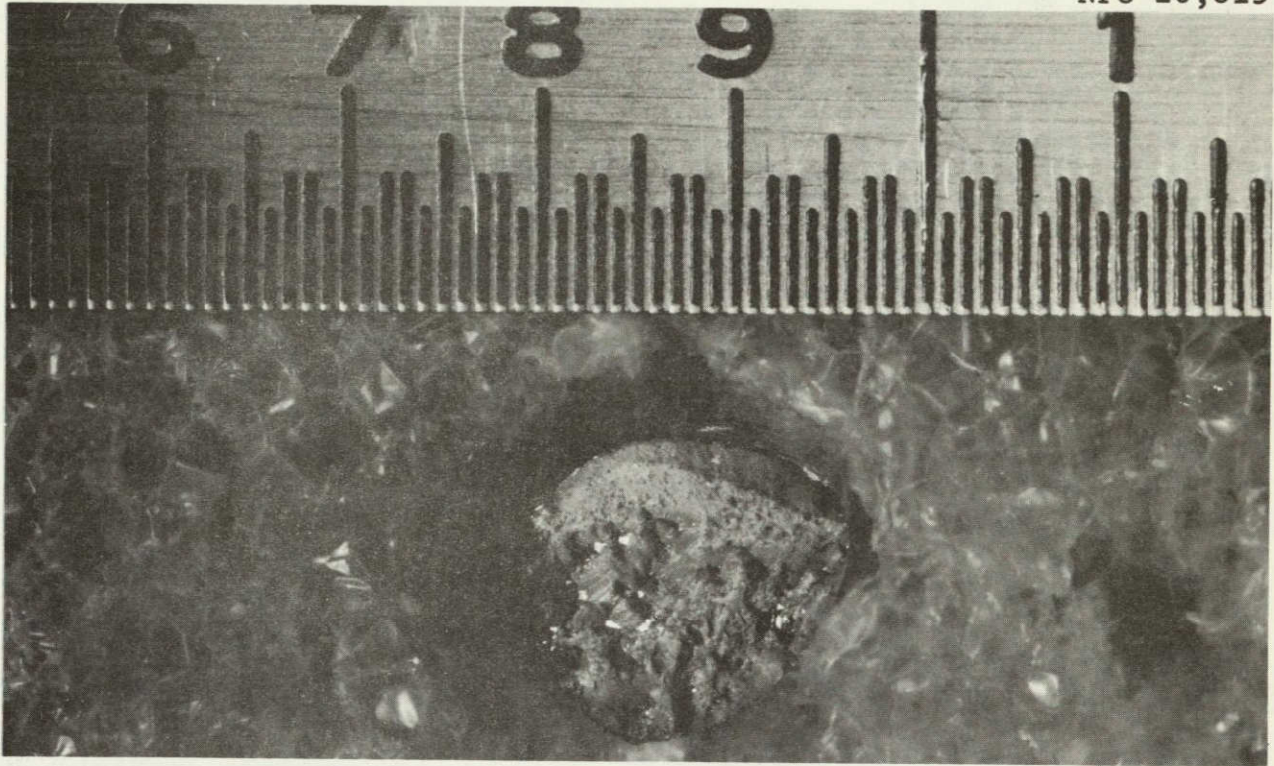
Macrograph (10X) of As-Welded Aluminum 7039-T61, Specimen AW-12: Irradiated at 140°R and Annealed at 540°R
